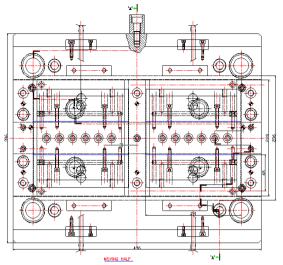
Top view of Assembly- Split 12 cavity Injection Mould (Moving Half)
